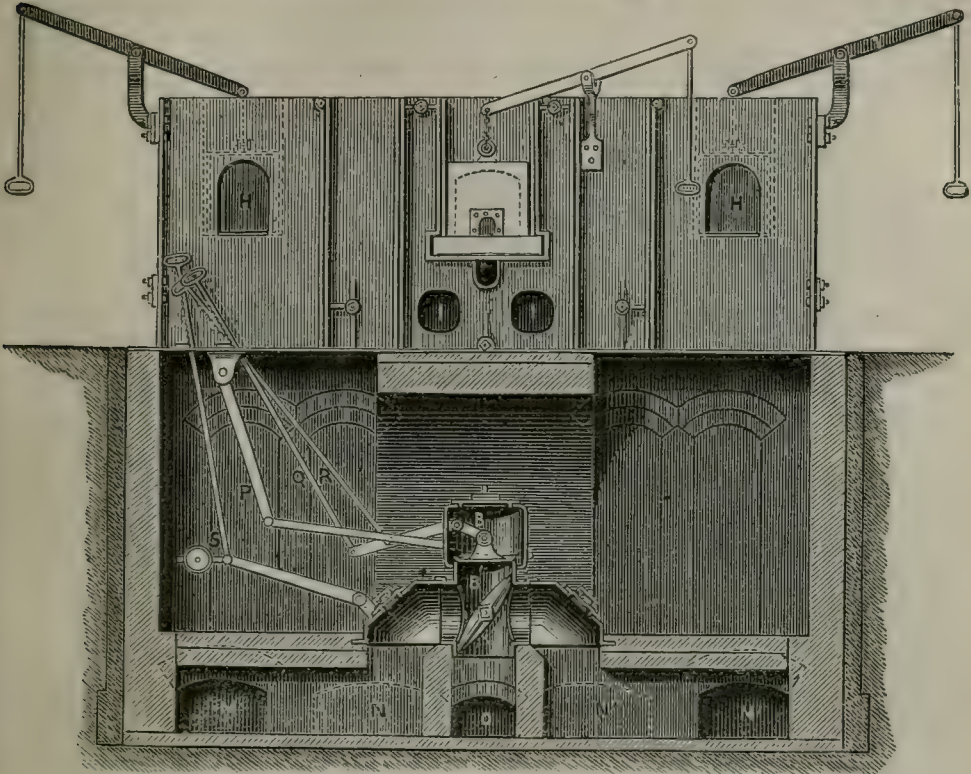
Front Elevation of Puddling-Furnace. Scale $\frac{3}{16}$ inch to a foot.
